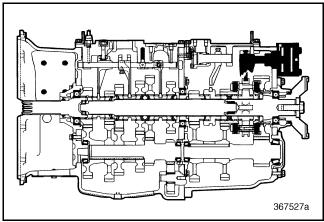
Range Shift Cylinder Locator (T313L/T318L Shown)
